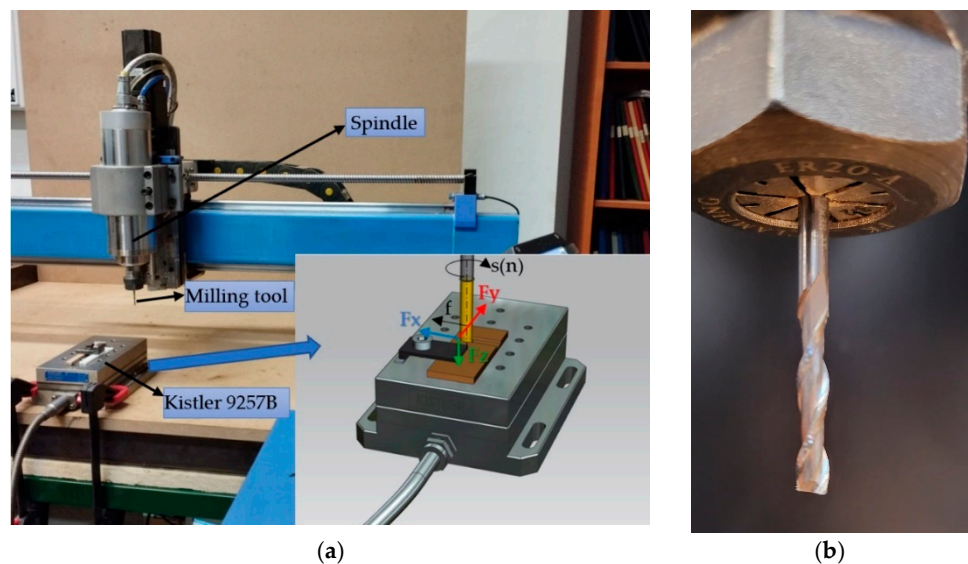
Slot milling tests setup: (a) cutting force measurement; (b) the end-milling tool.
